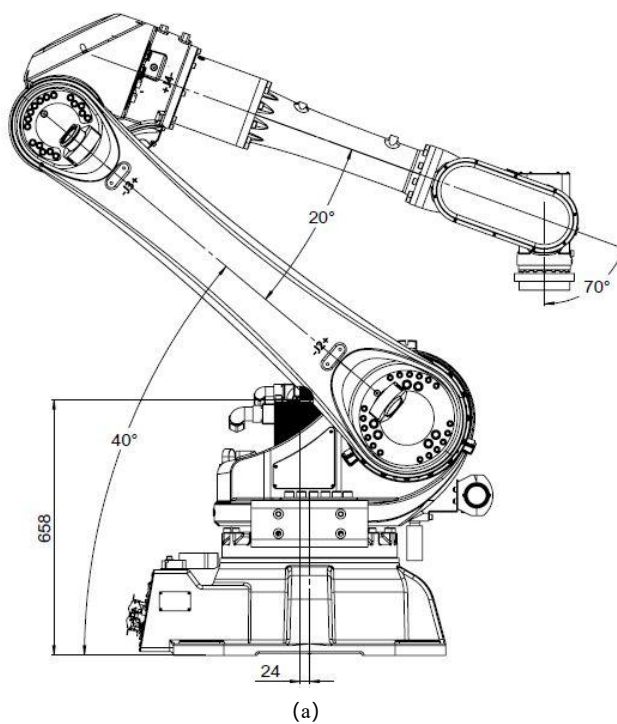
Operating dimensions of the RX3-A650-2260/RX3-A680-2260 handling machine
